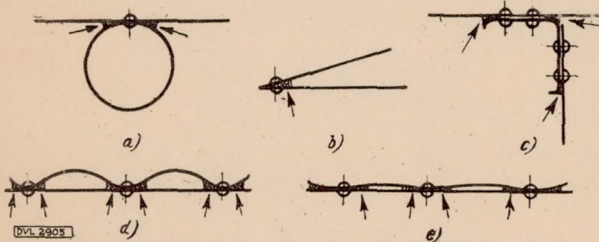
Points on seaplane parts from which corrosion usually spreads; (increased corrosion at points marked by arrows). a) junction of round tube with sheet-metal covering. b) trailing edge of wing and tail surfaces where the upper and lower coverings meet. c) junction point of sheets and angle strip. d) corrugated sheet riveted to a round tube or to a section strip. e) smooth sheet buckled by riveting to a round tube or section strip.
